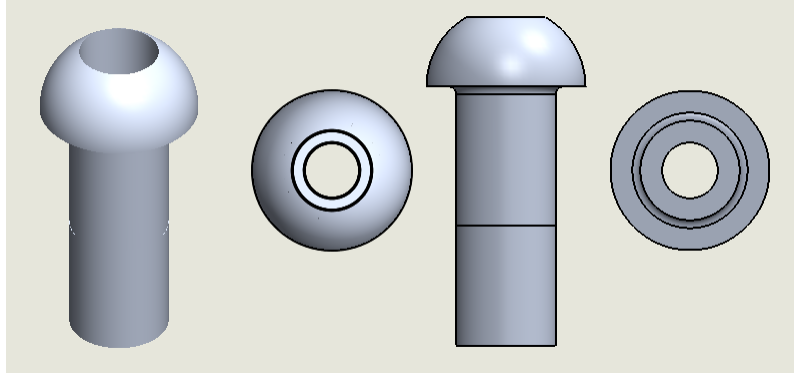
SolidWorks CAD drawing of a possible pin configuration. Left: pin isometric view. Right: pin top view, lateral and bottom view.
